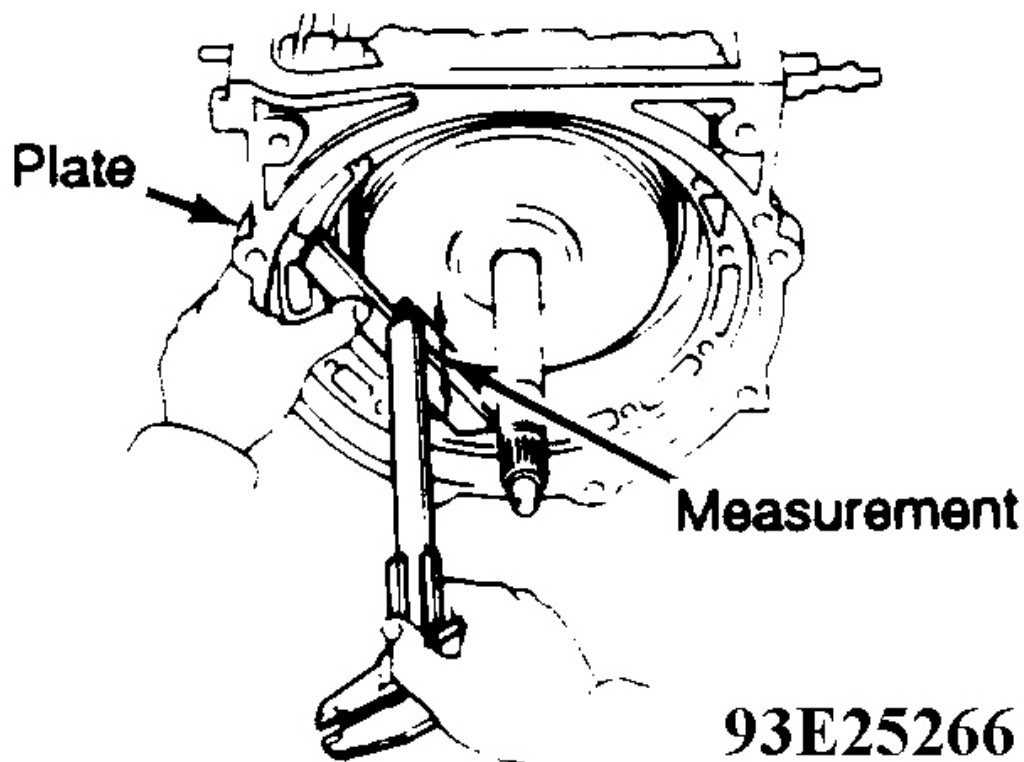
OD Planetary Gear, Direct & One-Way Clutch Installation
